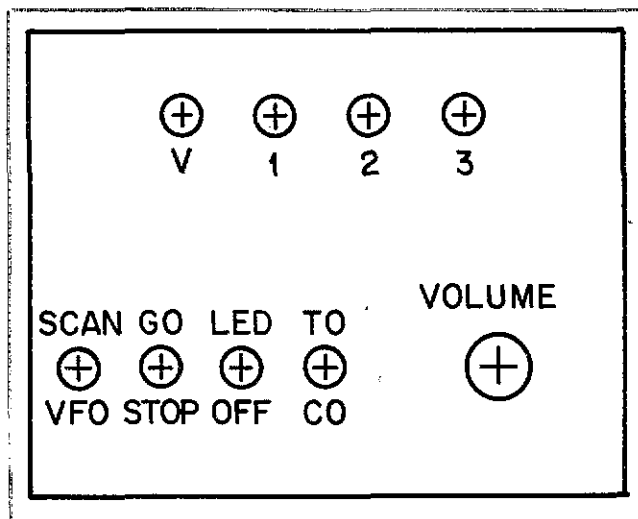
Full-size drilling template for the front of the plastic case. Modification 1 requires no hole drilling; modification 2 requires adding only the VOLUME control hole and modification 3 requires all holes. Photocopy or cut out this drawing and directly mark the case for accurate hole locations. See text for hole diameters.
